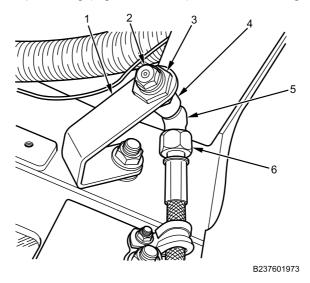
Rear FSS Cabin/Crew Dispersion Unit and Pipe (Right Side Shown, Left Side Similar).
